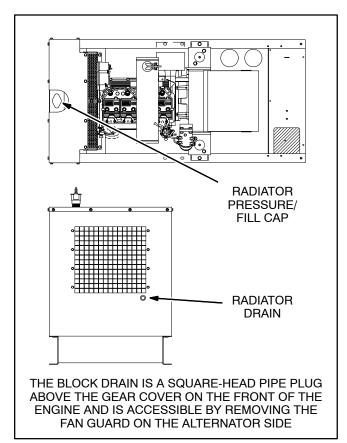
COOLANT FILL AND DRAIN POINTS
